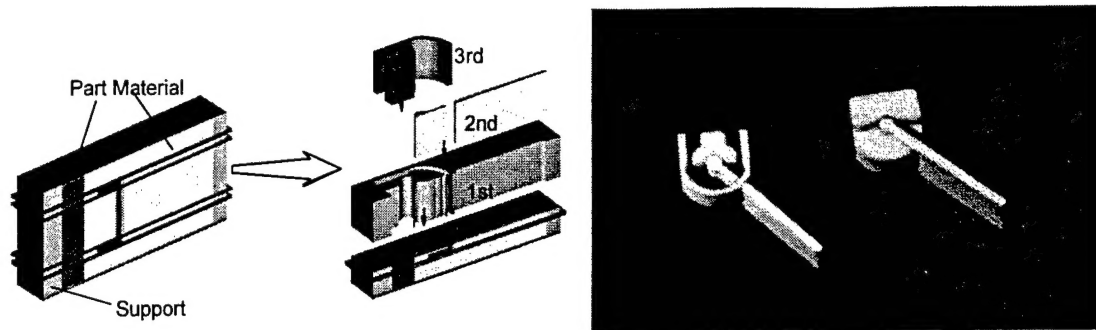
Decomposition and build-up of complex, multiply connected geometries using Shape Deposition Manufacturing. On right, completed polyurethane MiTE showing pneumatic chamber.
